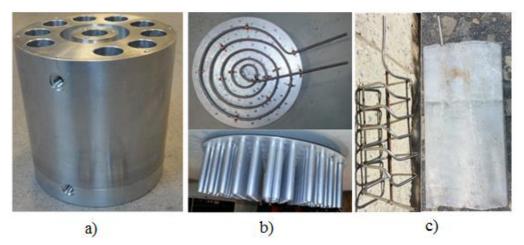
Actual test units of heat exchanger for PCM storage a) aluminum block with PCM cavity b) aluminum plate with fins and c) aluminum box with helical steam pipe
